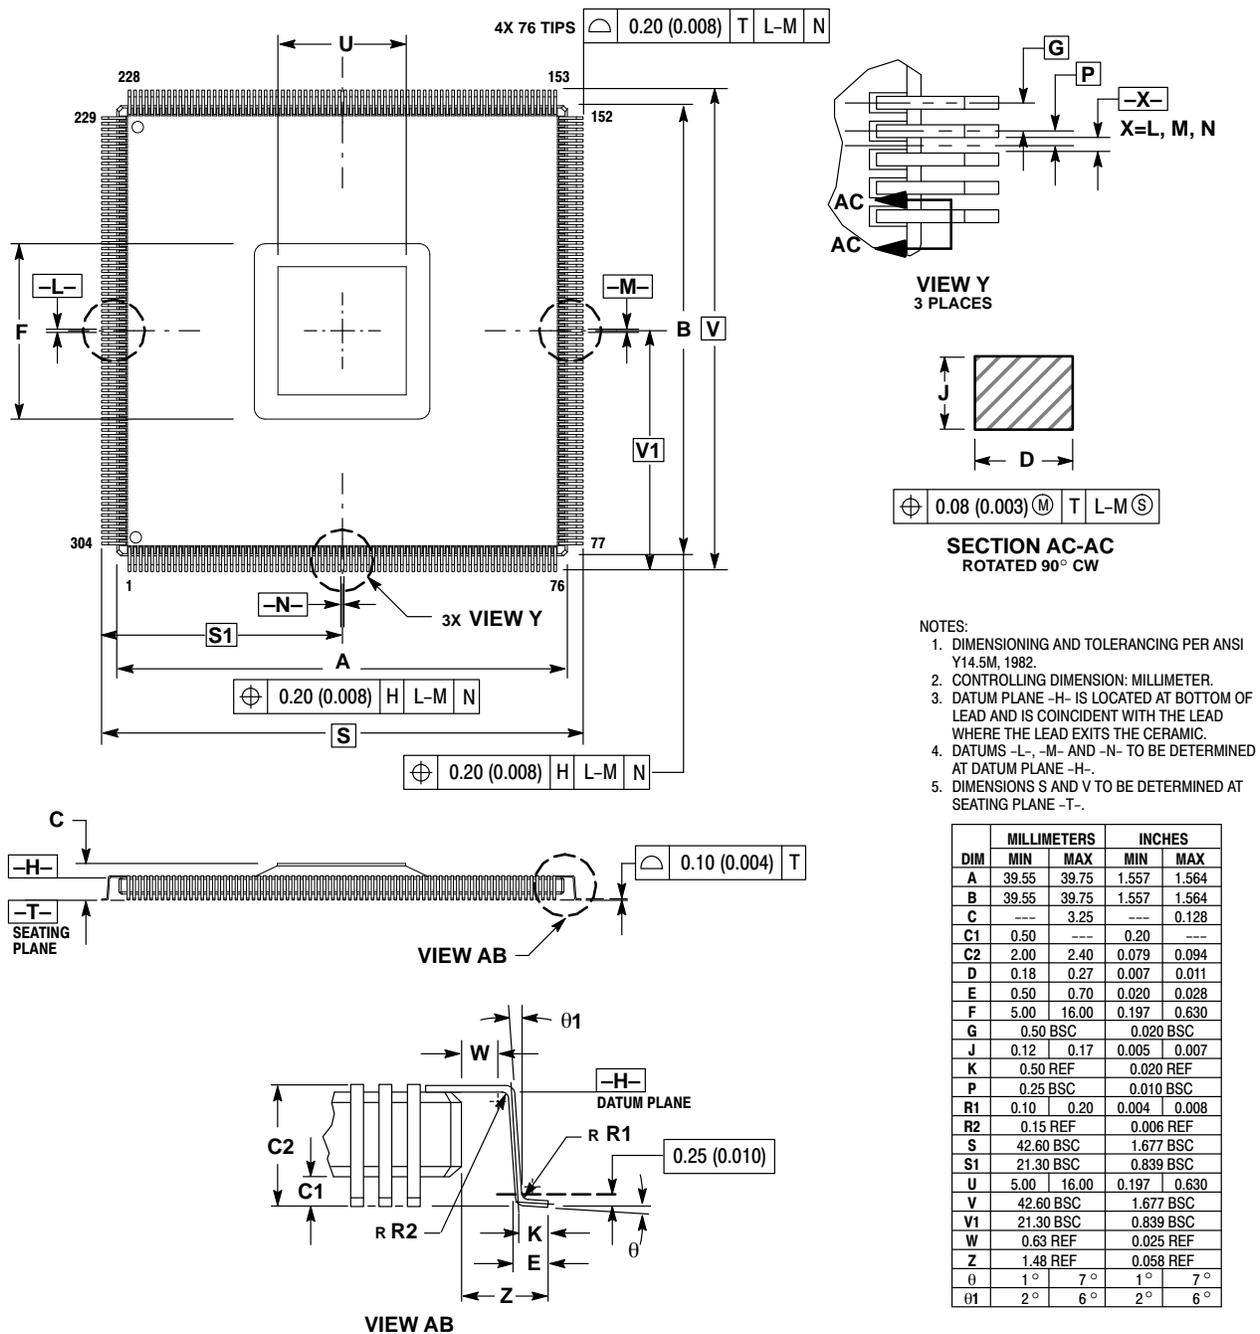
Mechanical Dimensions of the Motorola C4-CQFP Package
